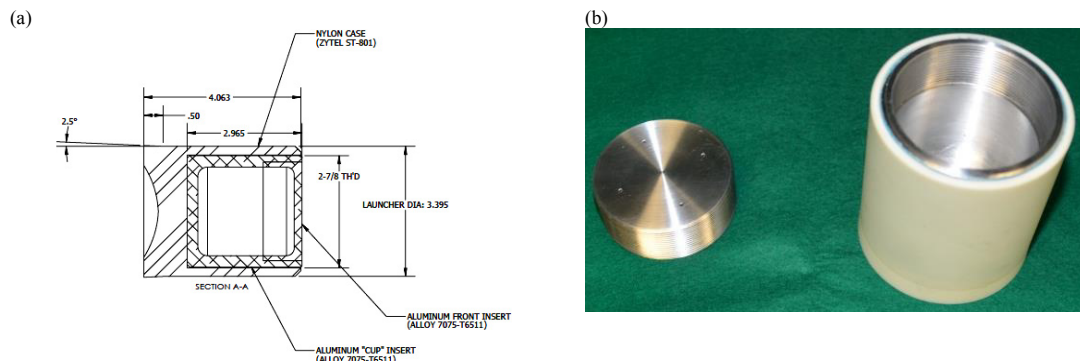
Images of the projectile for the catalogued debris AEDC test (a) scaled drawing of the assembled projectile (drawing units in inches) and (b) photo of the projectile prior to mounting the front insert into the cup insert.
